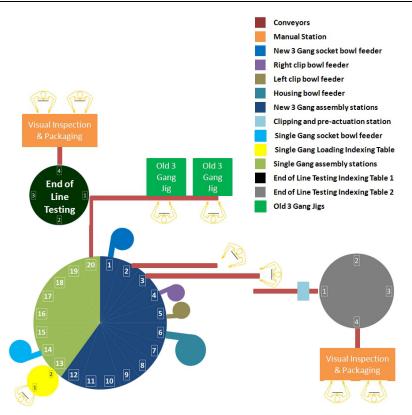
Proposed layout for combined assembly in a single cell (Concept 4)
